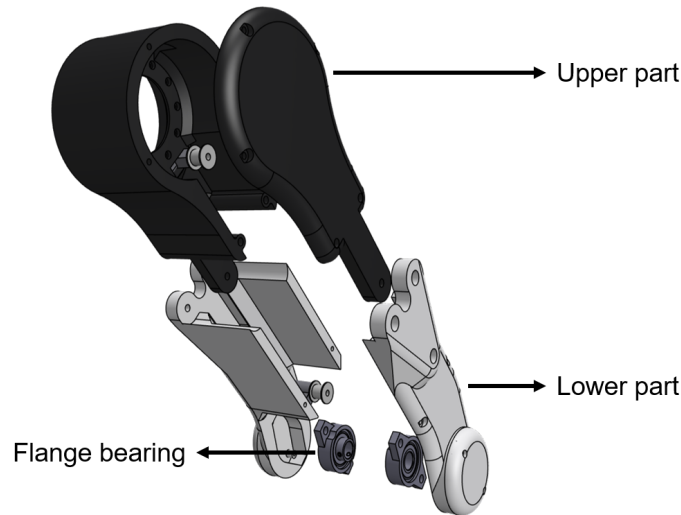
Thigh exploded view. The thigh is divided into upper(black) and lower(white) parts, each consisting of a shell and a cover.
